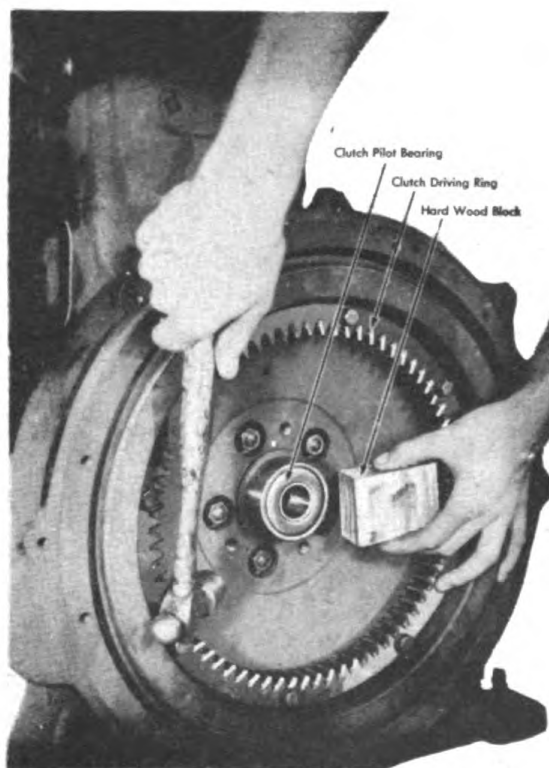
Driving Pilot Bearing into Flywheel Recess.
